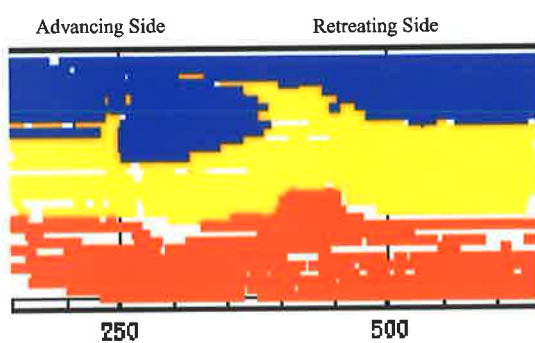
Marker Positions Across Layers for a Cold Weld
